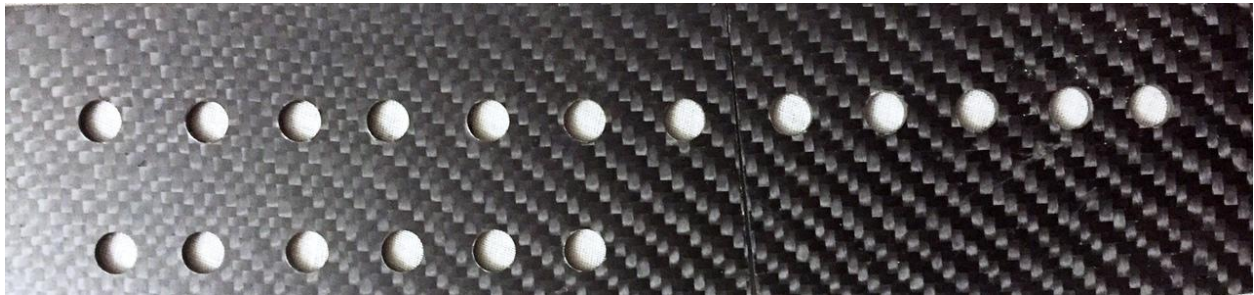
CFRP workpiece after experiment on FANUC CNC machining centre.
